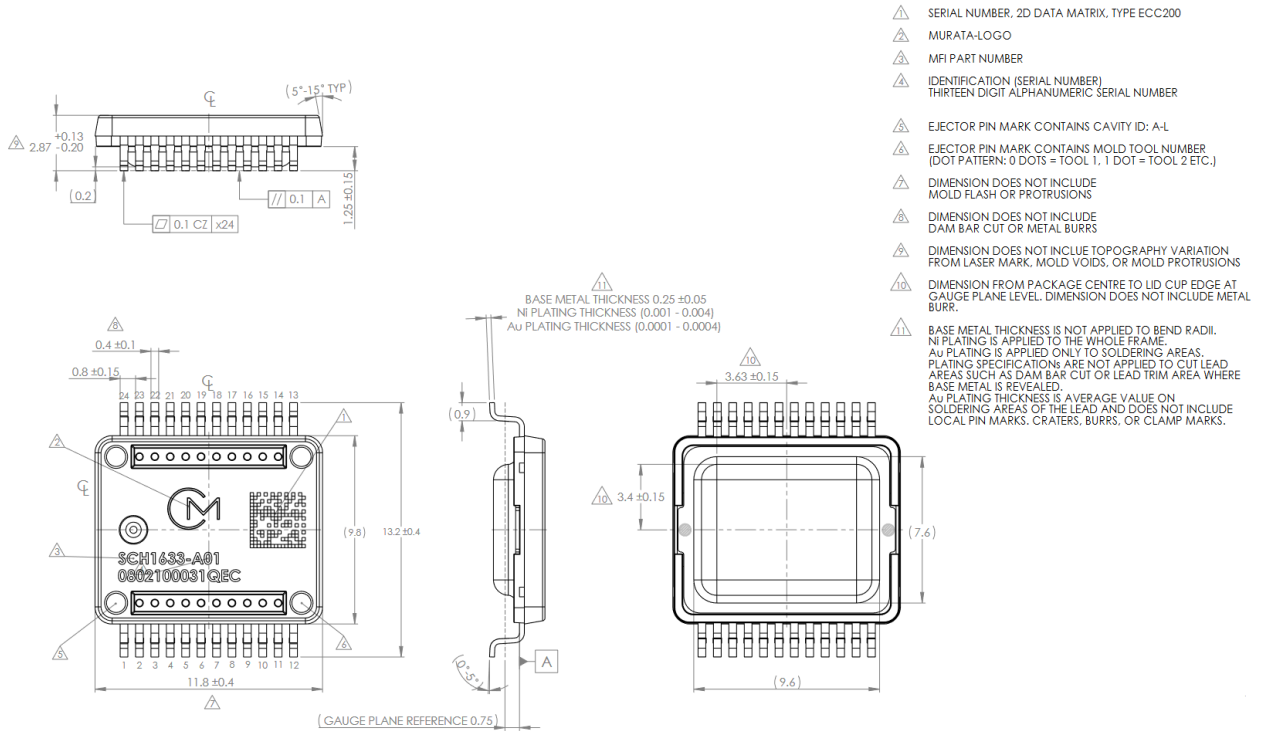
The outline of SCH16T package. All dimensions are in millimeters. All angles are in degrees. Tolerances unless otherwise specified according to ISO2768-f. This figure is preliminary and will be updated later.
